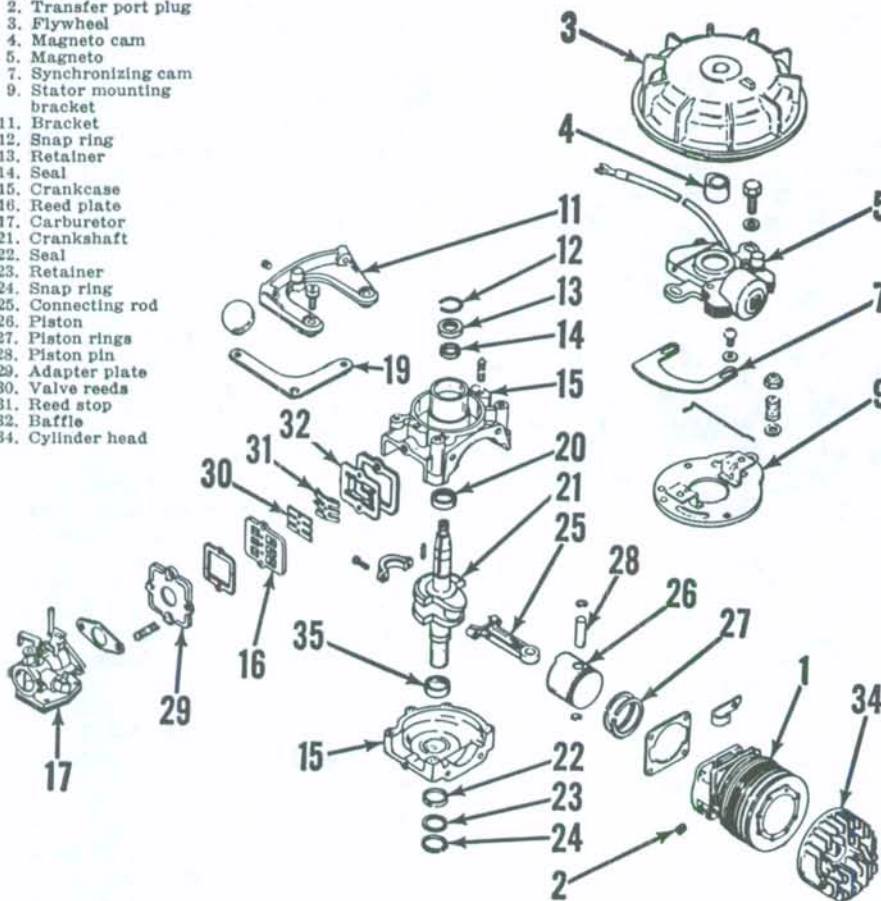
Exploded view of power head, typical of V58 and V61 models.
